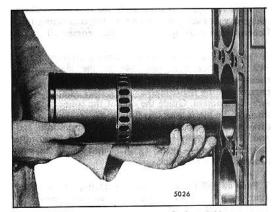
Installing Piston, Rod and Liner Assembly in Cylinder Block
